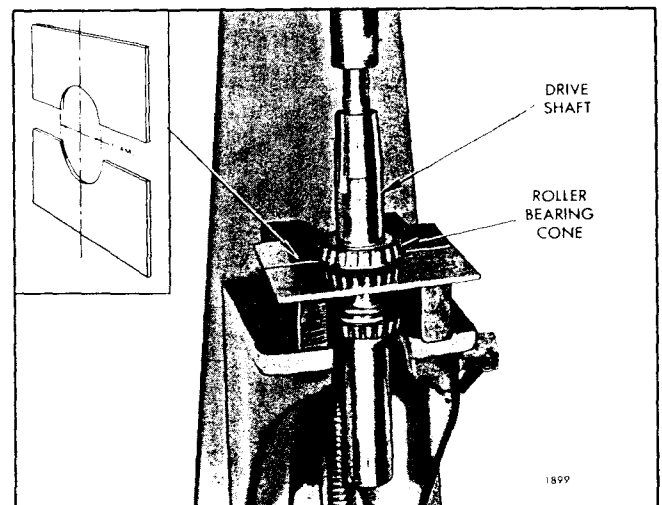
Removing Roller Bearing Cone from Clutch Drive Shaft
